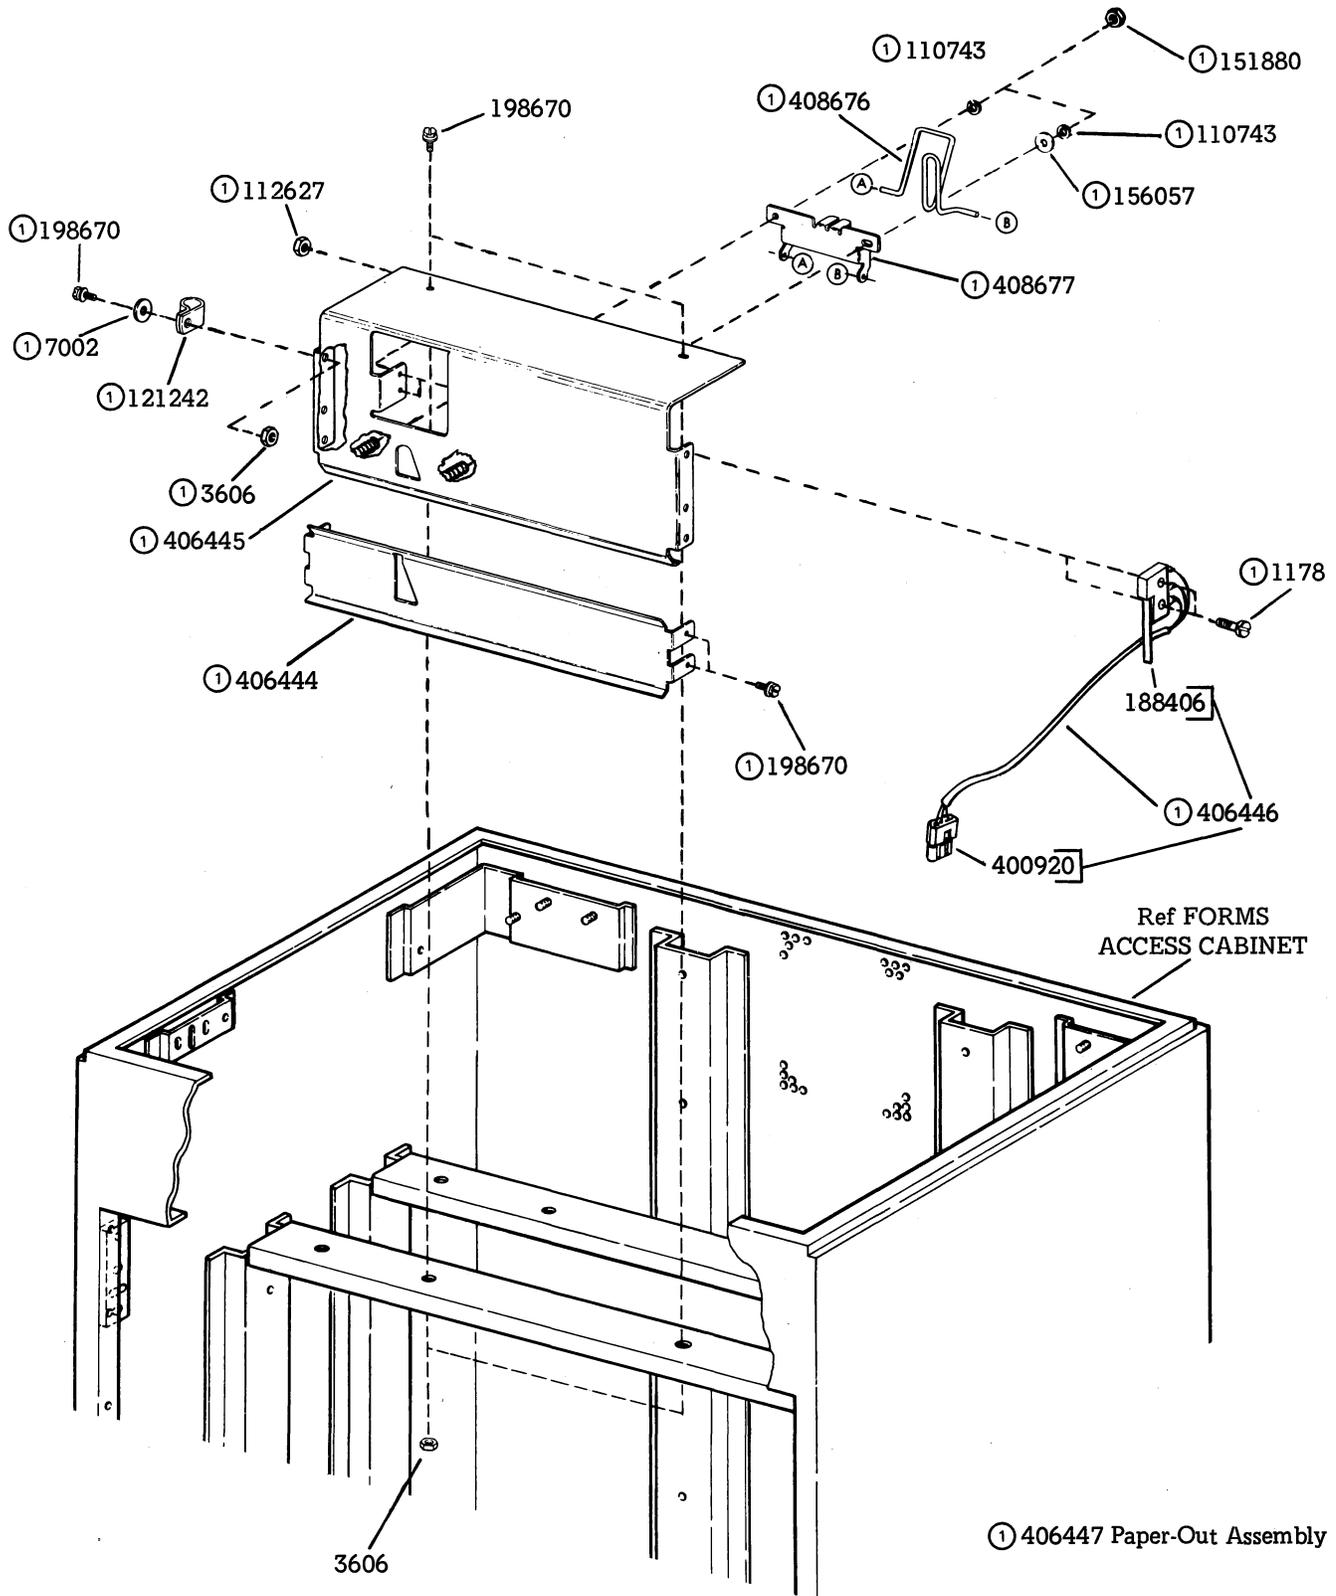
406374 Modification Kit to Provide Paper-Out Contact Closure 11 Inches Below Print Line in the Forms Access Printer Cabinet
